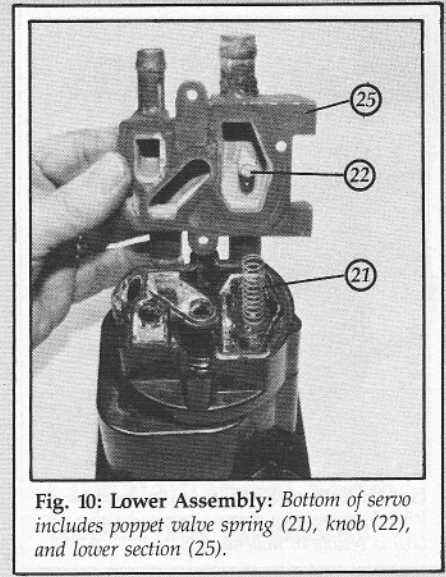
Lower Assembly: Bottom of servo includes poppet valve spring (21), knob (22), and lower section (25).
